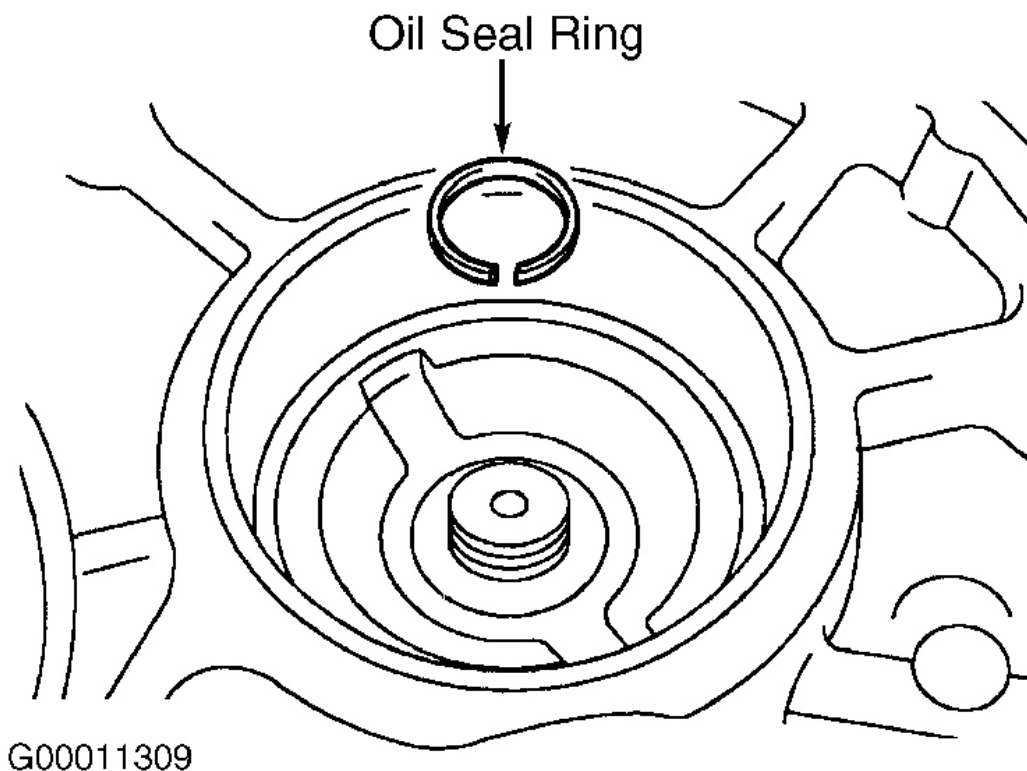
Removing & Installing Transaxle Housing Oil Seal Ring
